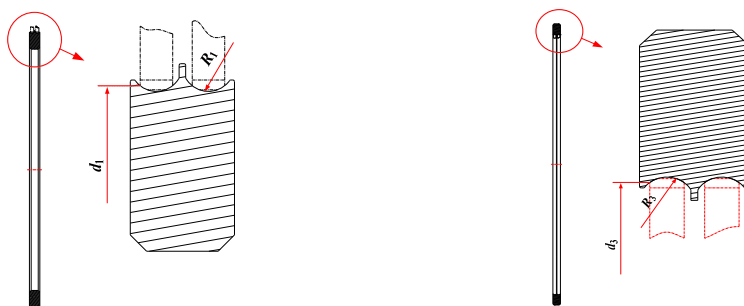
Inner and outer raceway dimensions of the signal rolling ring
